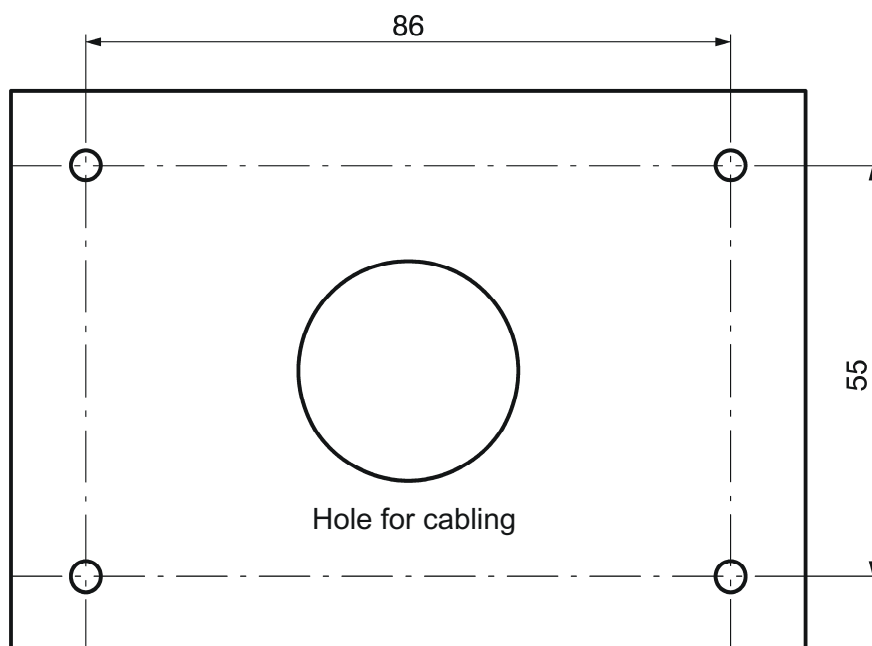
Mounting on a stand – attaching the WE2107
